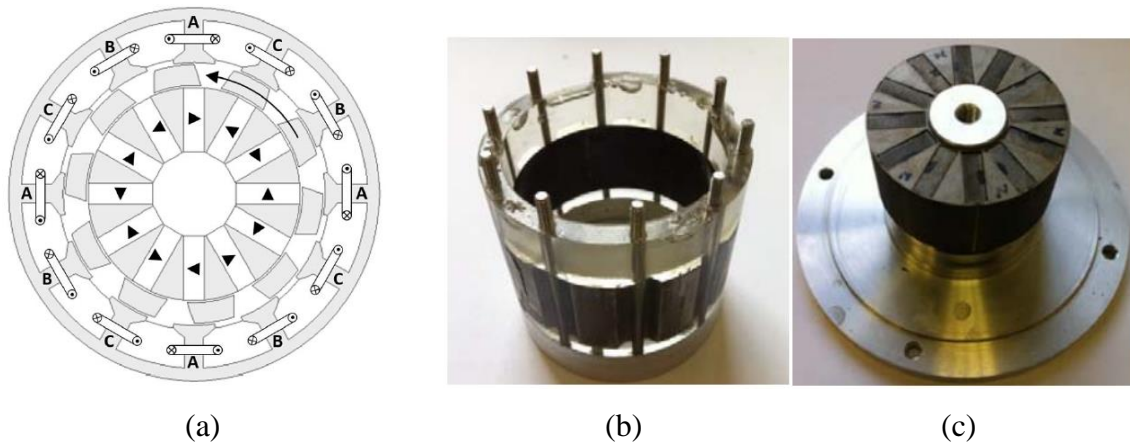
Partitioned-stator FSPM machine, (a) machine cross sectional view, (b) finished rotor after resin modeling, (c) inner side of the stator with permanent magnets [202].
